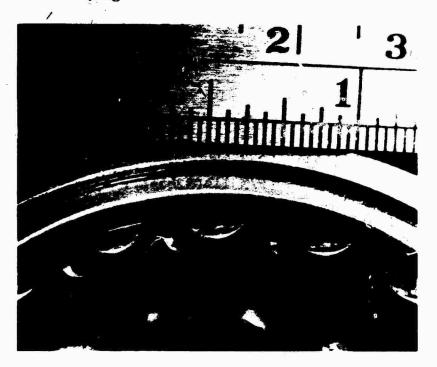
Roller Bearing End Wear (P/N 114DS249-1).
